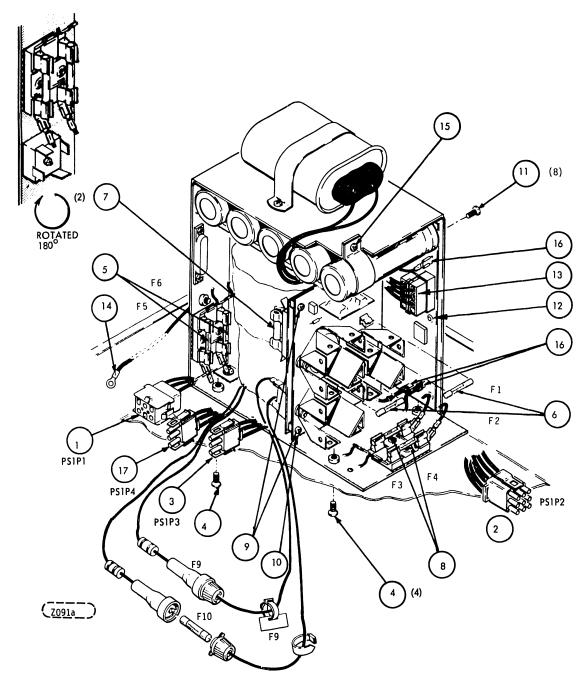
POWER SUPPLY ASSEMBLY
